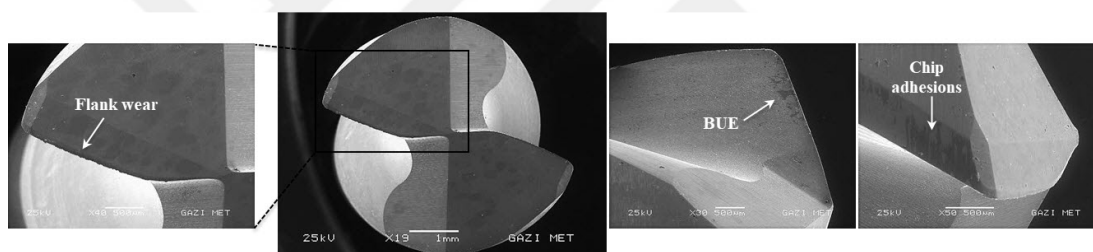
Tool wear types on uncoated twist drill after three holes at 10 m/min under dry conditions.
